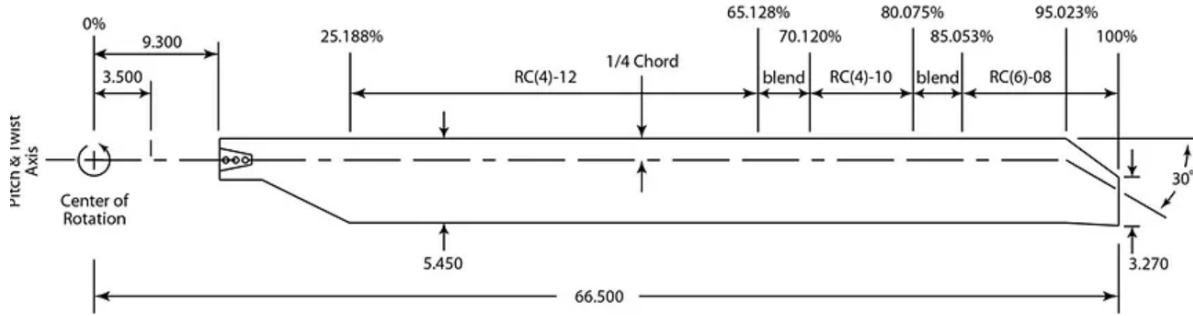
Geometry of the HVAB rotor blade planform [12].
